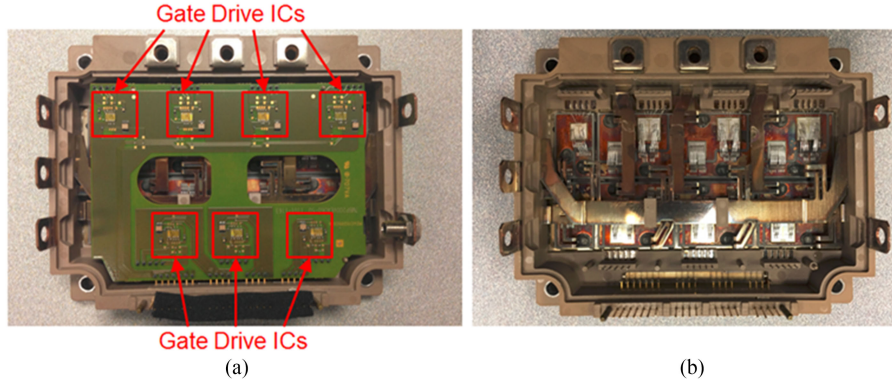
Fuji Electric 7MBP200VEA060-50 IPM module. (a) Driver and control circuit board. (b) IGBTs and FWDs on the bottom.
